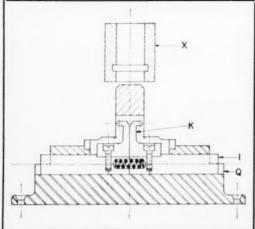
Drawing showing manner in which sleeve is inserted on gaging fixture for checking diameter and concentricity of annular groove
